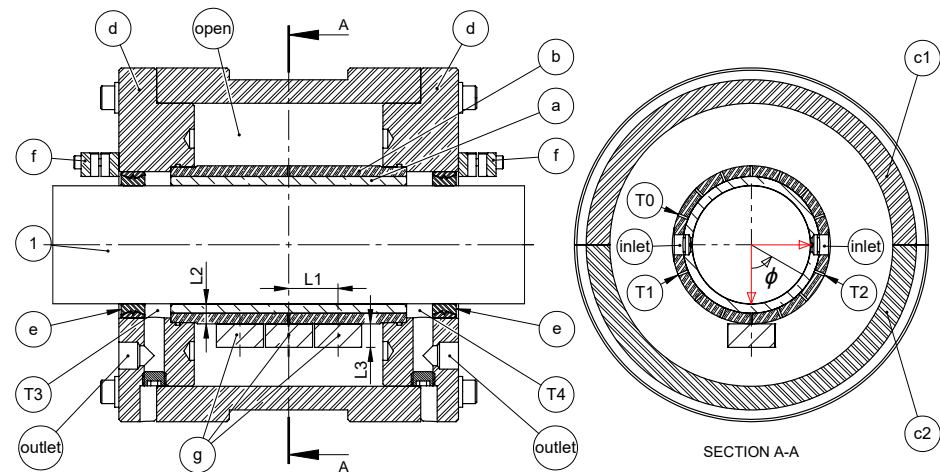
A section view of the bearing housing (component 3 in Figure 1). 1—shaft (component 1 in Figure 1); a—polymer inner bush; b—non-magnetic steel outer bush; c1/c2/d—housing components; e—non-magnetic contactless labyrinth seals; f—capacitive sensor clamps (component 8 in Figure 1); g—magnets; T0–T4—thermocouples (T3 and T4 were not present for all measurements). The lubricant inlets and outlets are marked as well. In the figure on the right, the red arrows represent the coordinate system with ϕ defined as the angular coordinate inside the bearing. The shaft rotates in the positive ϕ direction, and as an example of a possible position of the magnets, the magnets are shown at $\phi = 0^\circ$.
